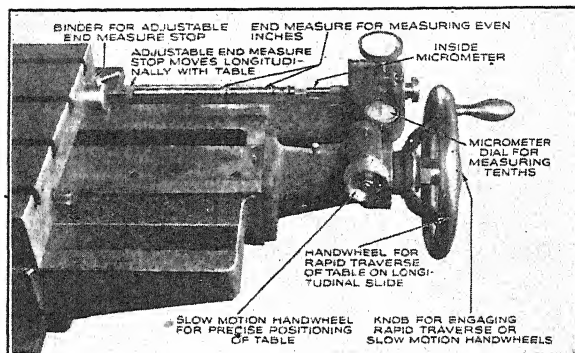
A Close-Up View of the Precision Setting Tool Used in the Final Setting of the Table for Machining Operations on the Pratt and Whitney Jig Borer.
